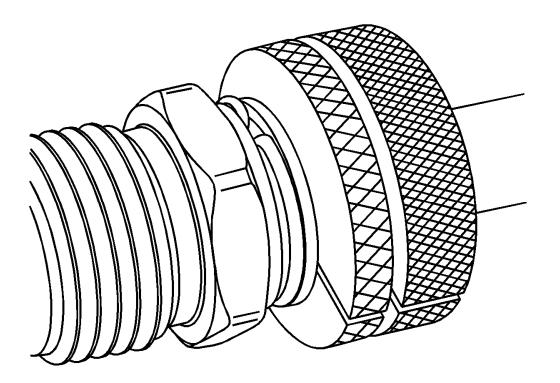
View Of J 41623-B & Generator Cooling Inlet Pipe Courtesy of GENERAL MOTORS COMPANY
